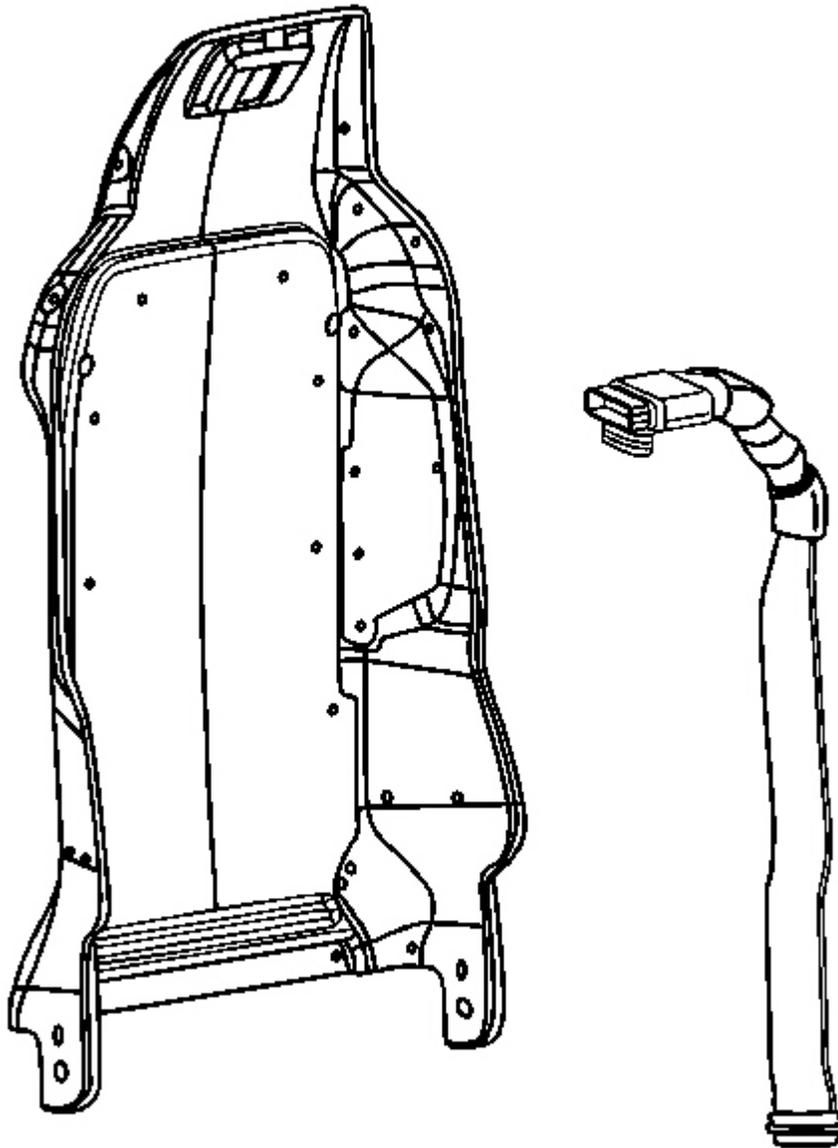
View Of Ventilation Module - Passenger Seat Back
